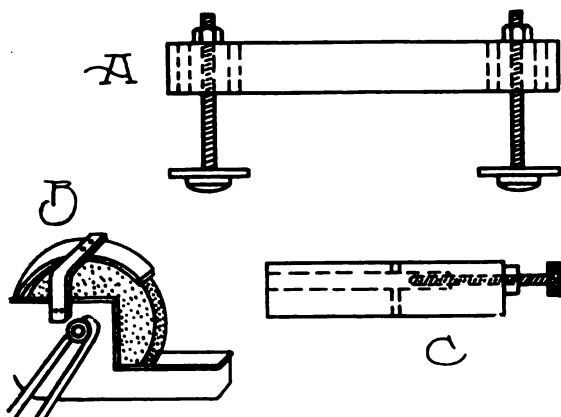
A, Flywheel Puller; B, Emery Wheel Guard; C, Jig for Drilling Cotter Holes.
